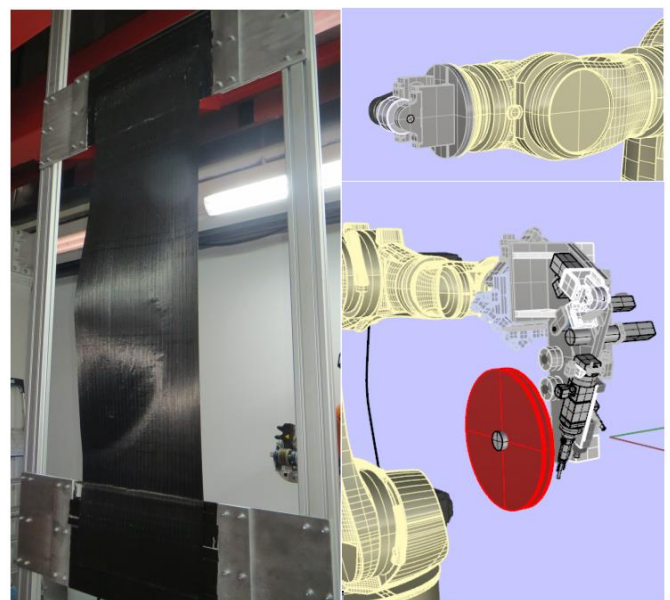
Metal frame with composite - left, mandrel roller (slave robot) - upper right and AFP head (master robot) - lower right
